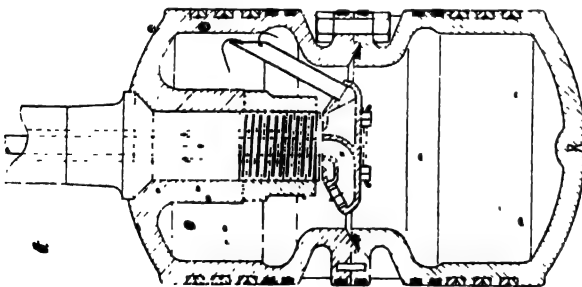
Section of Water-cooled Piston of Illmer Gas-engine.
